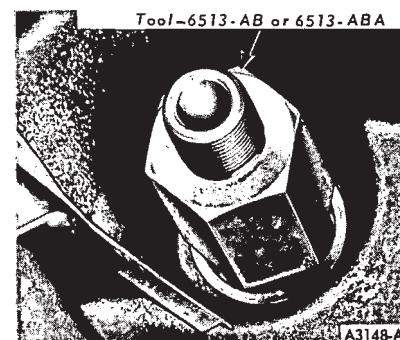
Installing Air Adapter Tool in Spark Plug Hole
